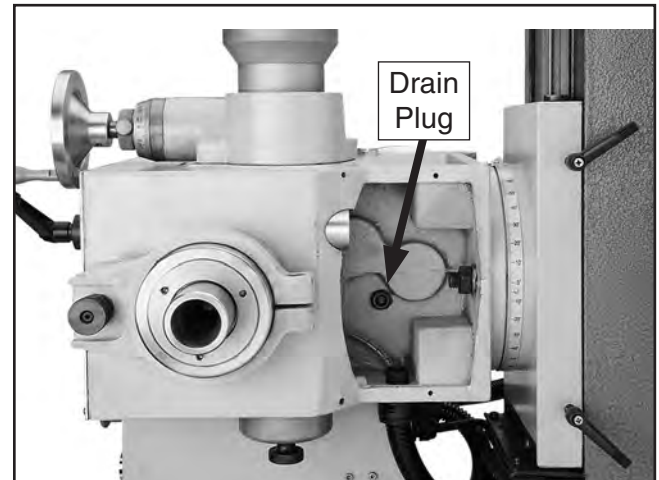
Headstock drain plug (headstock tilted 90° for clarity).
